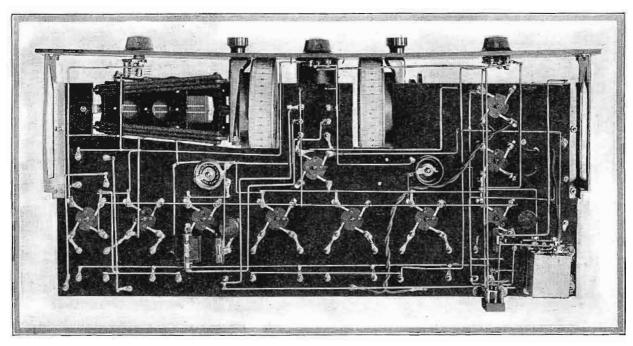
Photo D. Bottom view showing arrangement of parts mounted on under side of sub-panel
